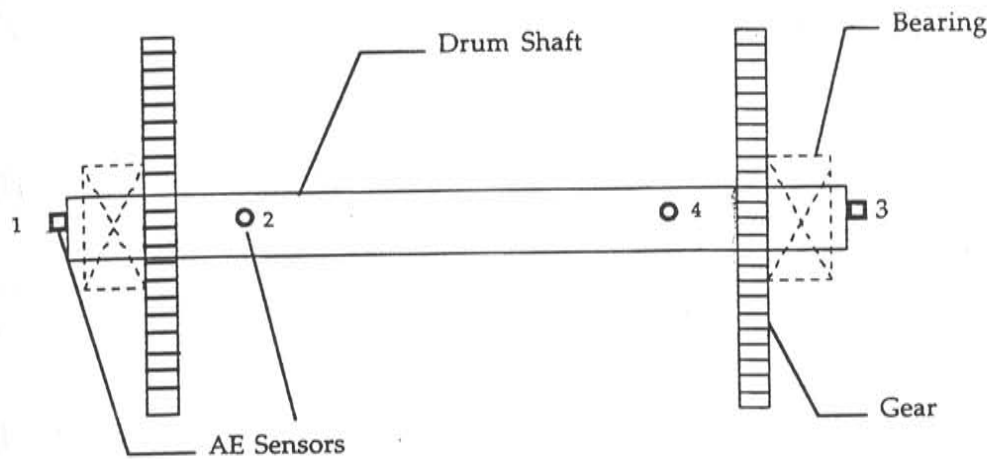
Schematic Layout of AE Sensors on the Drum Shaft
